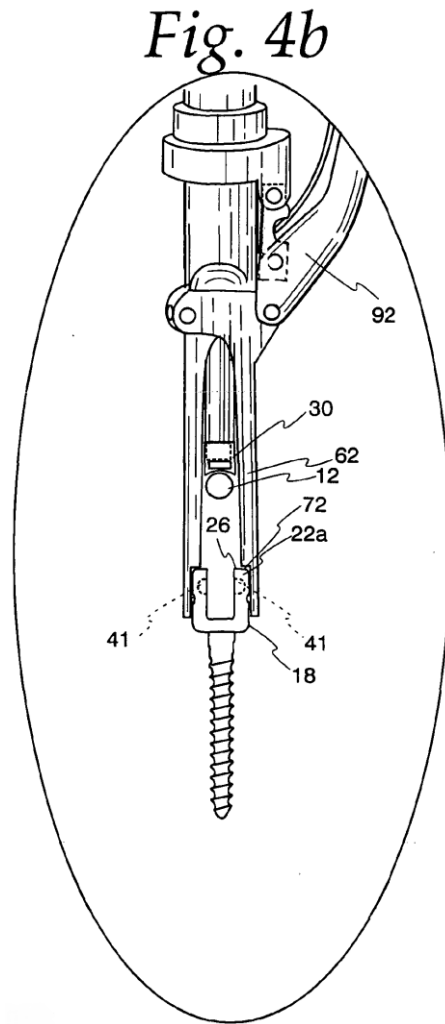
is a perspective view of the clamping subassembly 90 including jaws 60, 62. Ex. 1106 ¶ 11. Jaws 60, 62 each include tooth 38 to attach jaws 60, 62 to yoke 18 of pedicle screw fixture 16. *Id.* ¶ 48.
